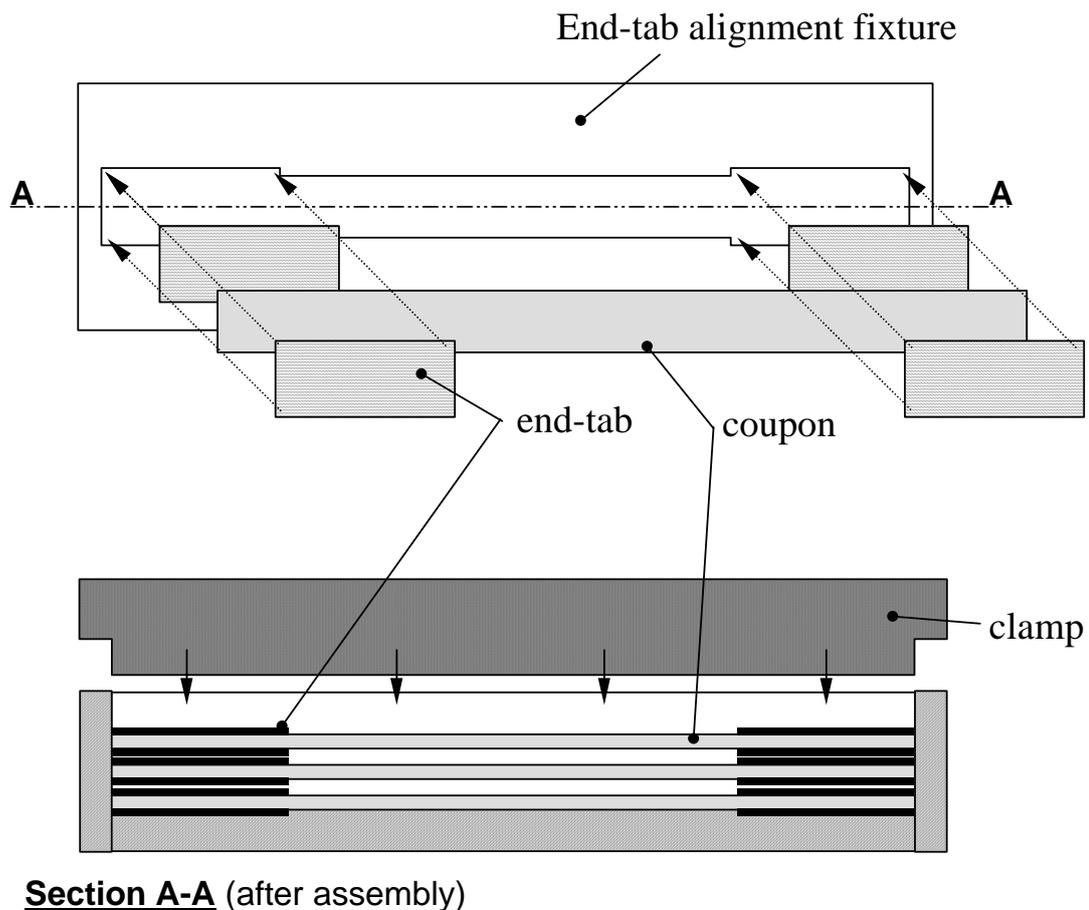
Plan view of alignment jig for end-tabbing test coupons
